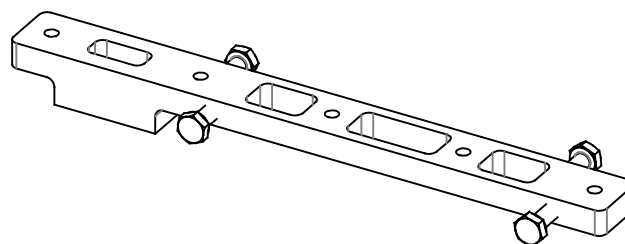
(C) UNIVERSAL BOTTOM STRAP
